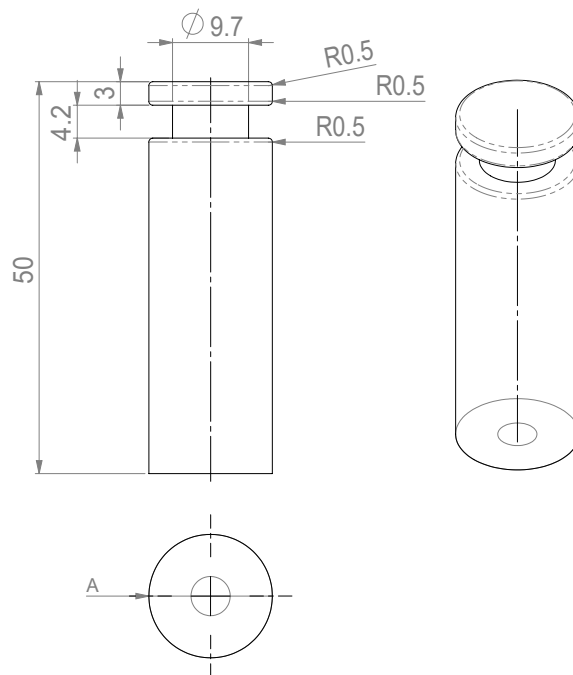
Drawing of the Piston with all its dimensions in mm. The external diameter "A" is a parametric dimension that will change according to the production method and material.
